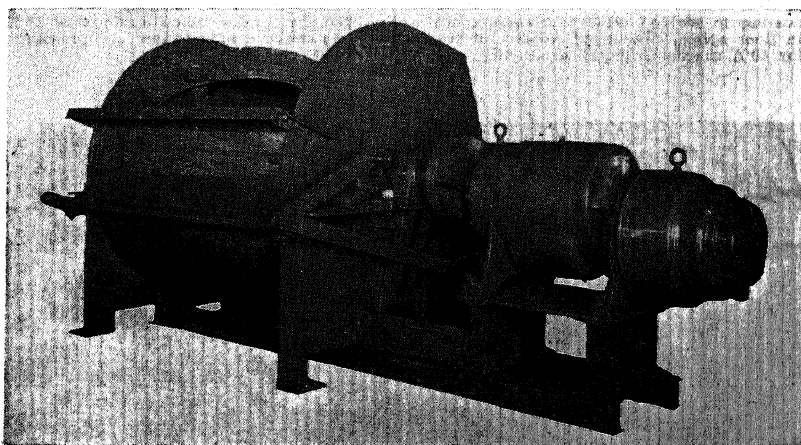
Concrete mixer used in conjunction with the forming machine shown in Fig. 1250, to produce concrete blocks, brick and tile. Built from steel plate and shapes by arc welding.
